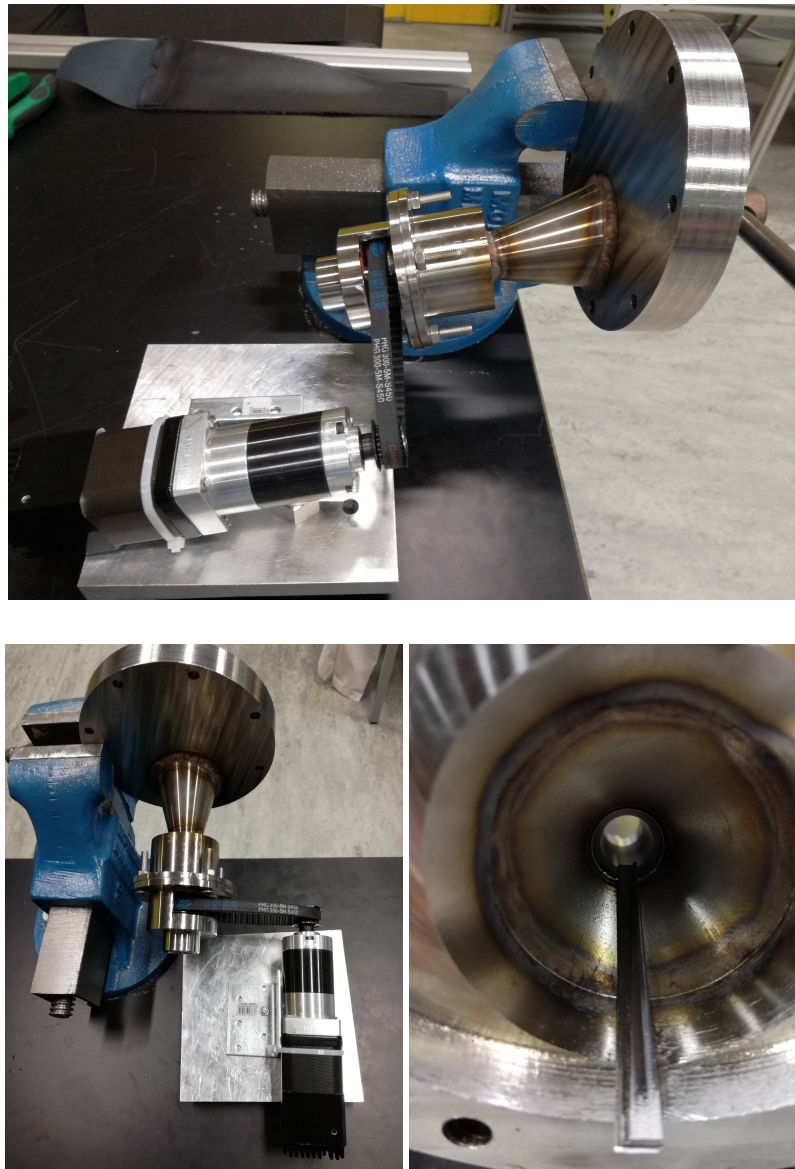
Holder used to fixate the scraper to the driven pipe
